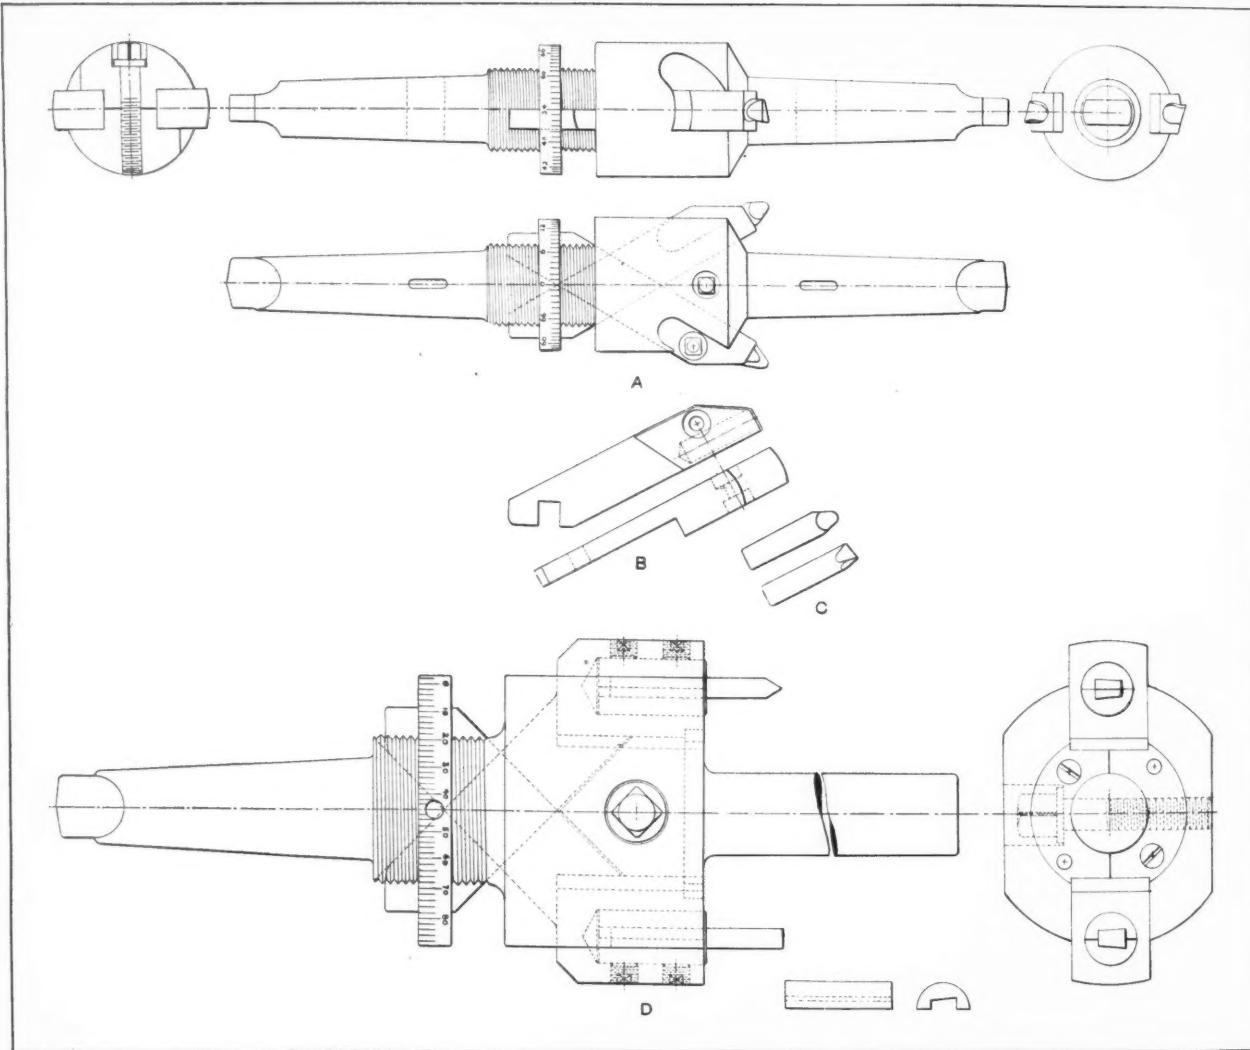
Boring and Reaming Bar with Micrometer Adjustment, and Trepanning Tool with Similar Adjusting Arrangement
